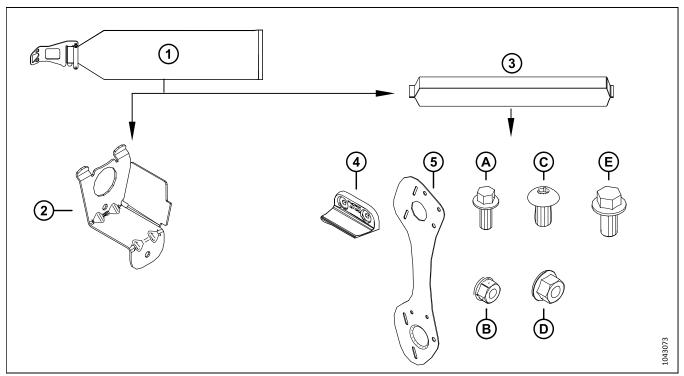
Parts to Retrieve from Nine-Bat Reel Endshields Parts Bag - MD #368328
